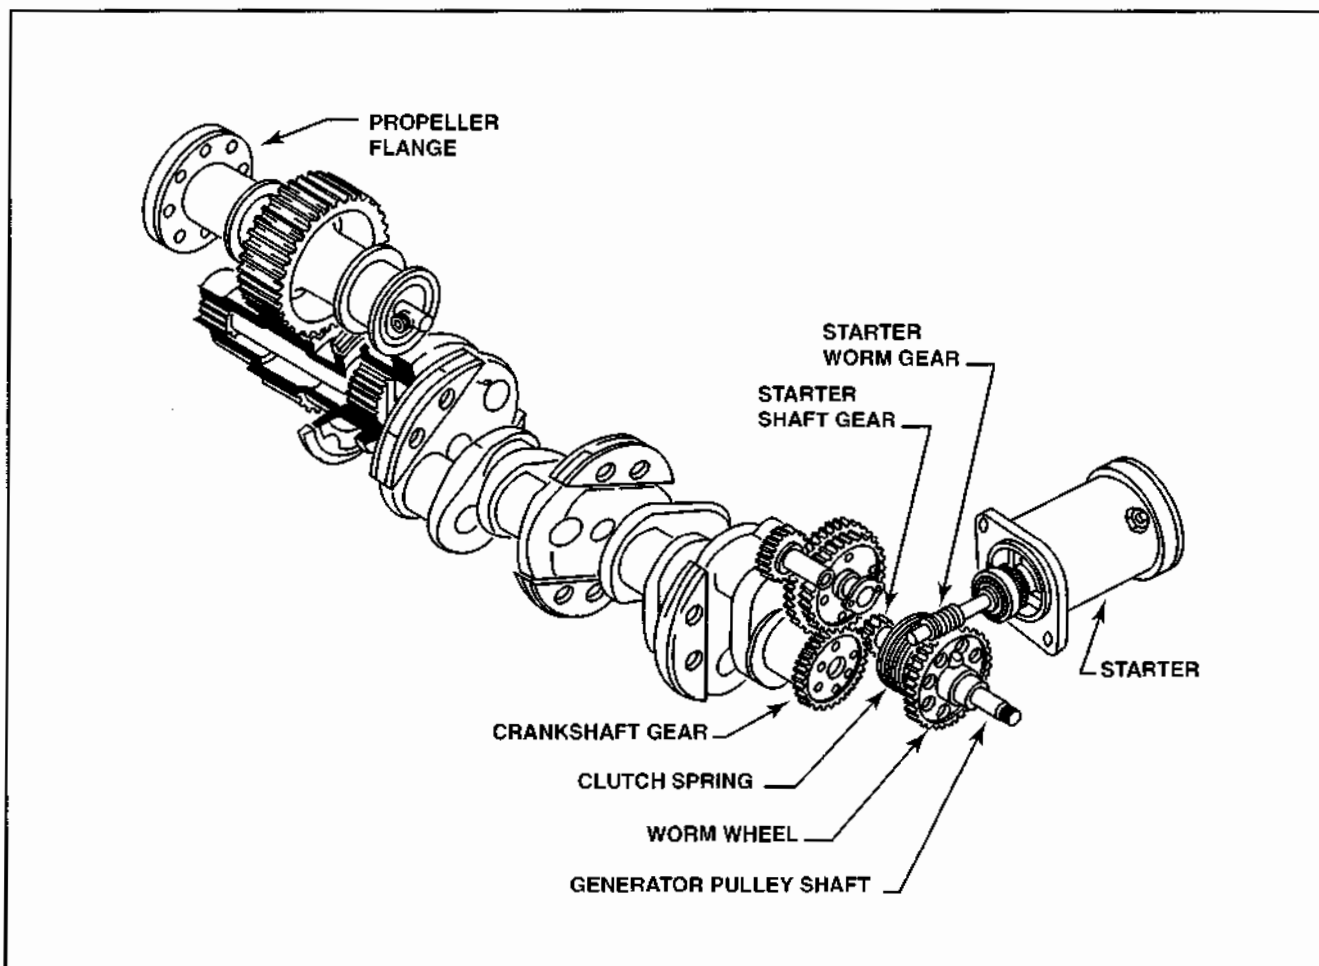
Teledyne Continental Motors aircraft engines commonly use a side-mounted starter with a worm-gear drive assembly. A clutch disengages the starter after the engine starts.
